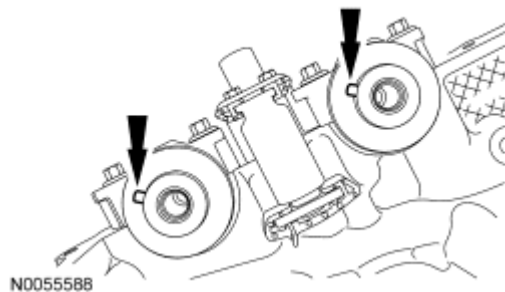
Rotating RH Camshafts Counterclockwise To Neutral Position
